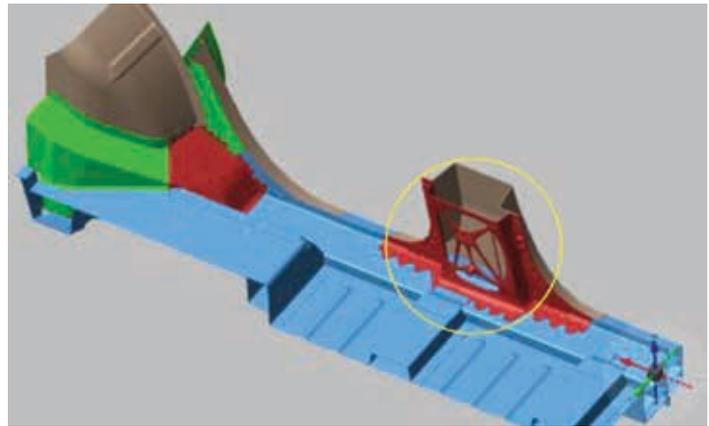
A laser additive manufactured (LAM) centre pillar component for a motorcar [8].
